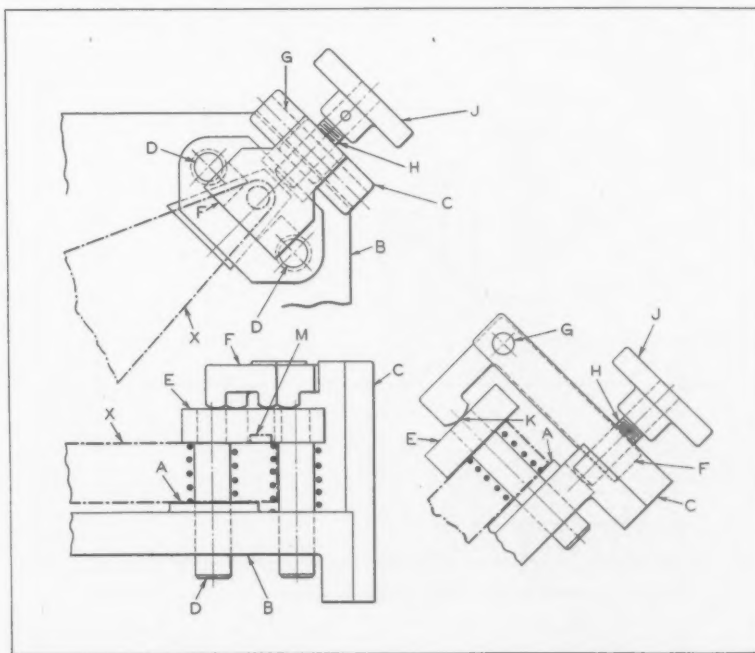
Work Clamping Device Provided with Clearance for Small Boss
